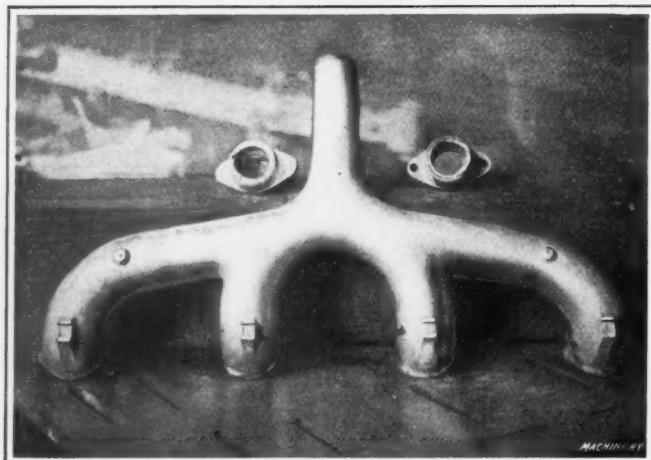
Aluminum Inlet Manifold with Broken Carburetor Flange
